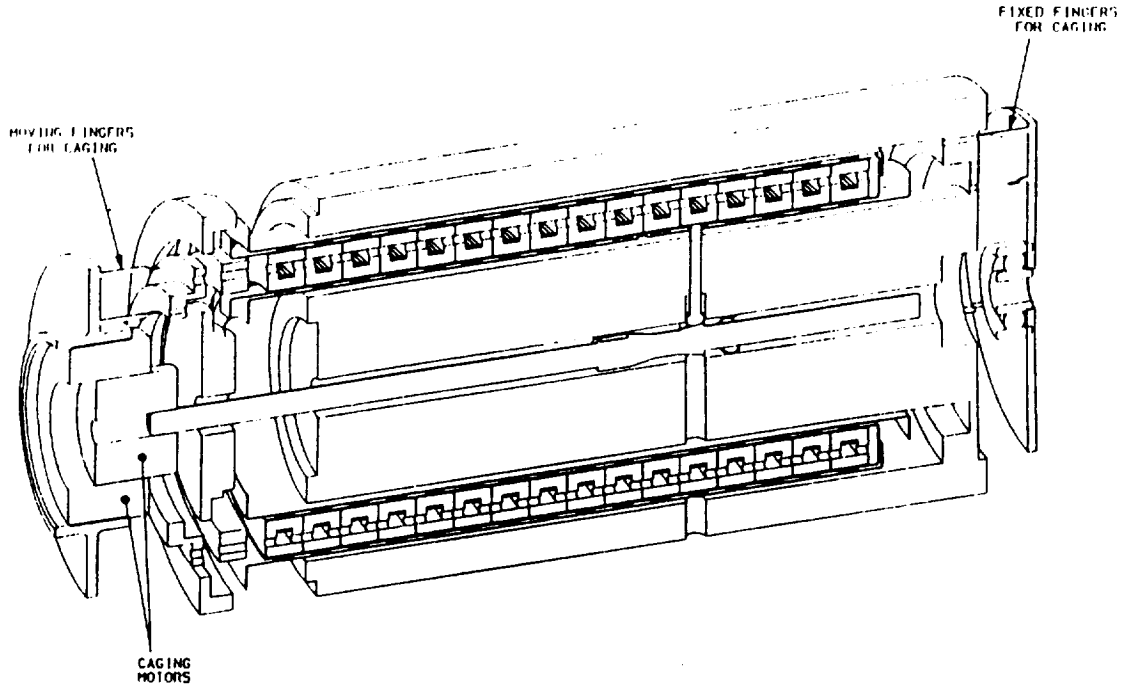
Exploded sectional view of the STEP spin-coupling differential accelerometer.
